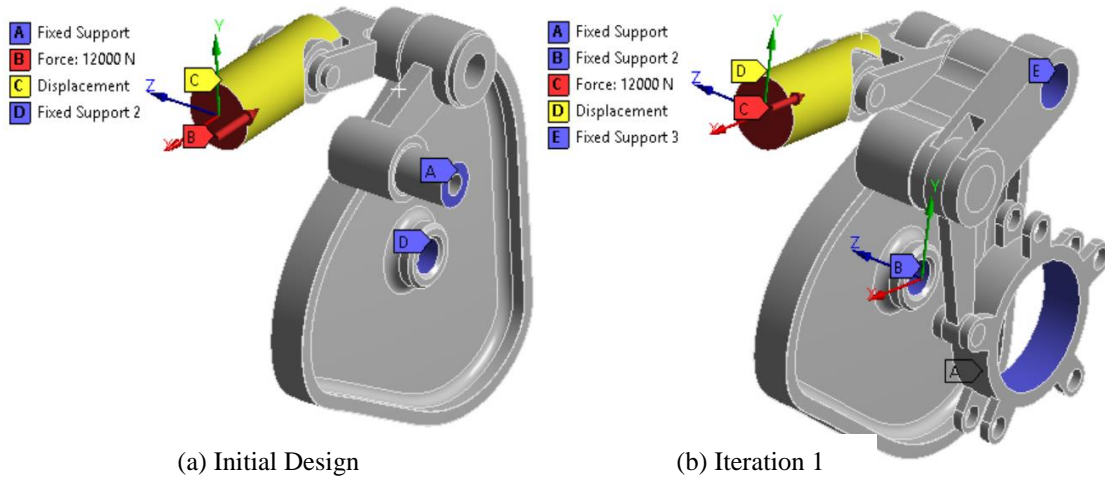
Boundary conditions of initial and iteration 1 cam pump assembly designs
